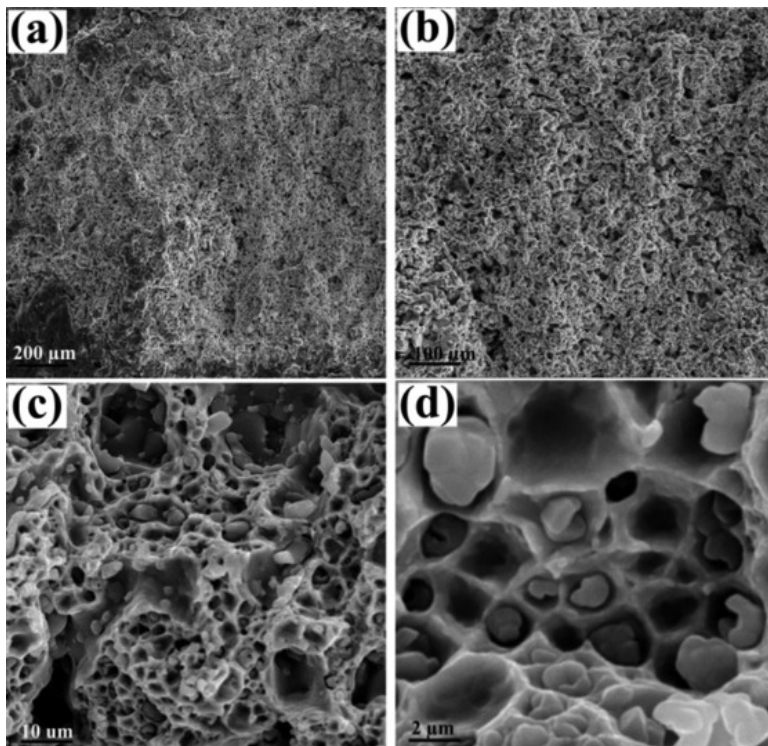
The fracture surfaced of the tensile test of the BAE sample with different magnifications
